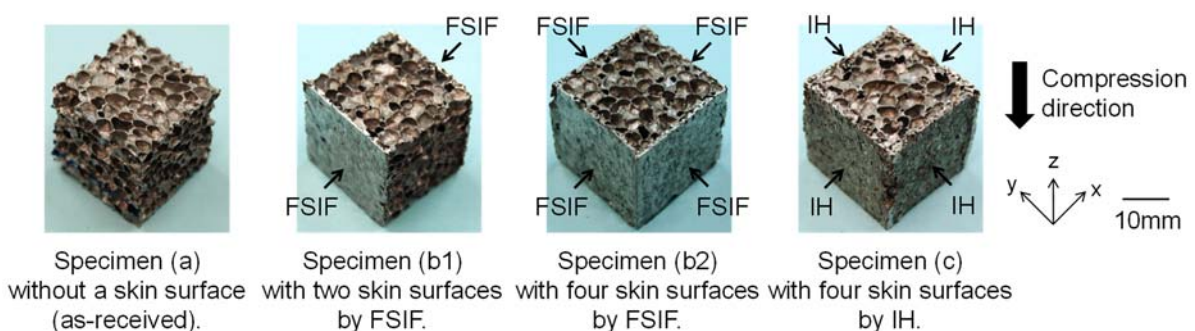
Appearances of aluminum foam specimens with/without skin surfaces prior to uniaxial compression testing (FSIF: friction stir incremental forming, IH: incremental hammering).
